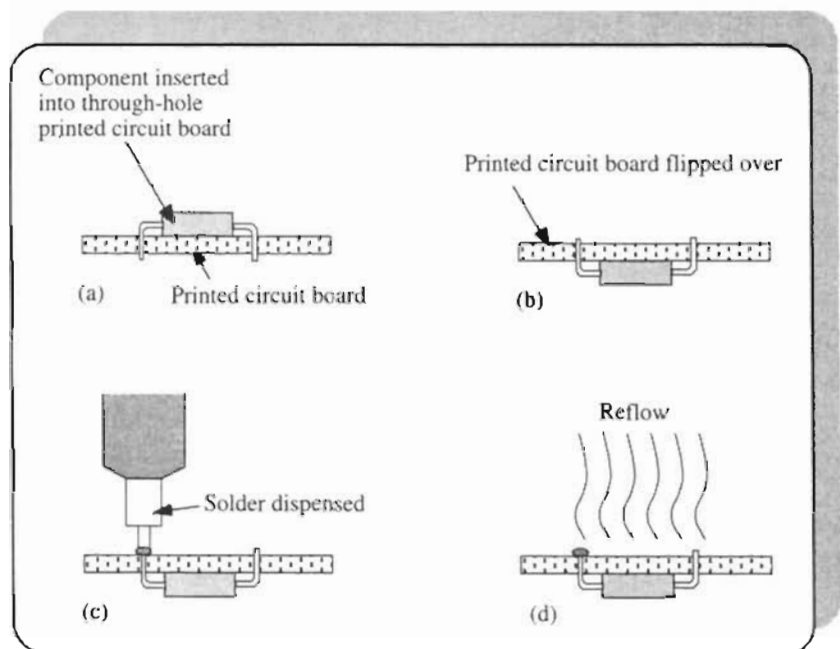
Pin-in-hole/intrusive reflow, or solder paste on through-hole technology (SPOTT) allows odd-shaped or large components and connectors to be mounted. First, the component is inserted (a), the board is inverted (b), the solder paste is dispensed (c), finally the board is reflow soldered (d)
